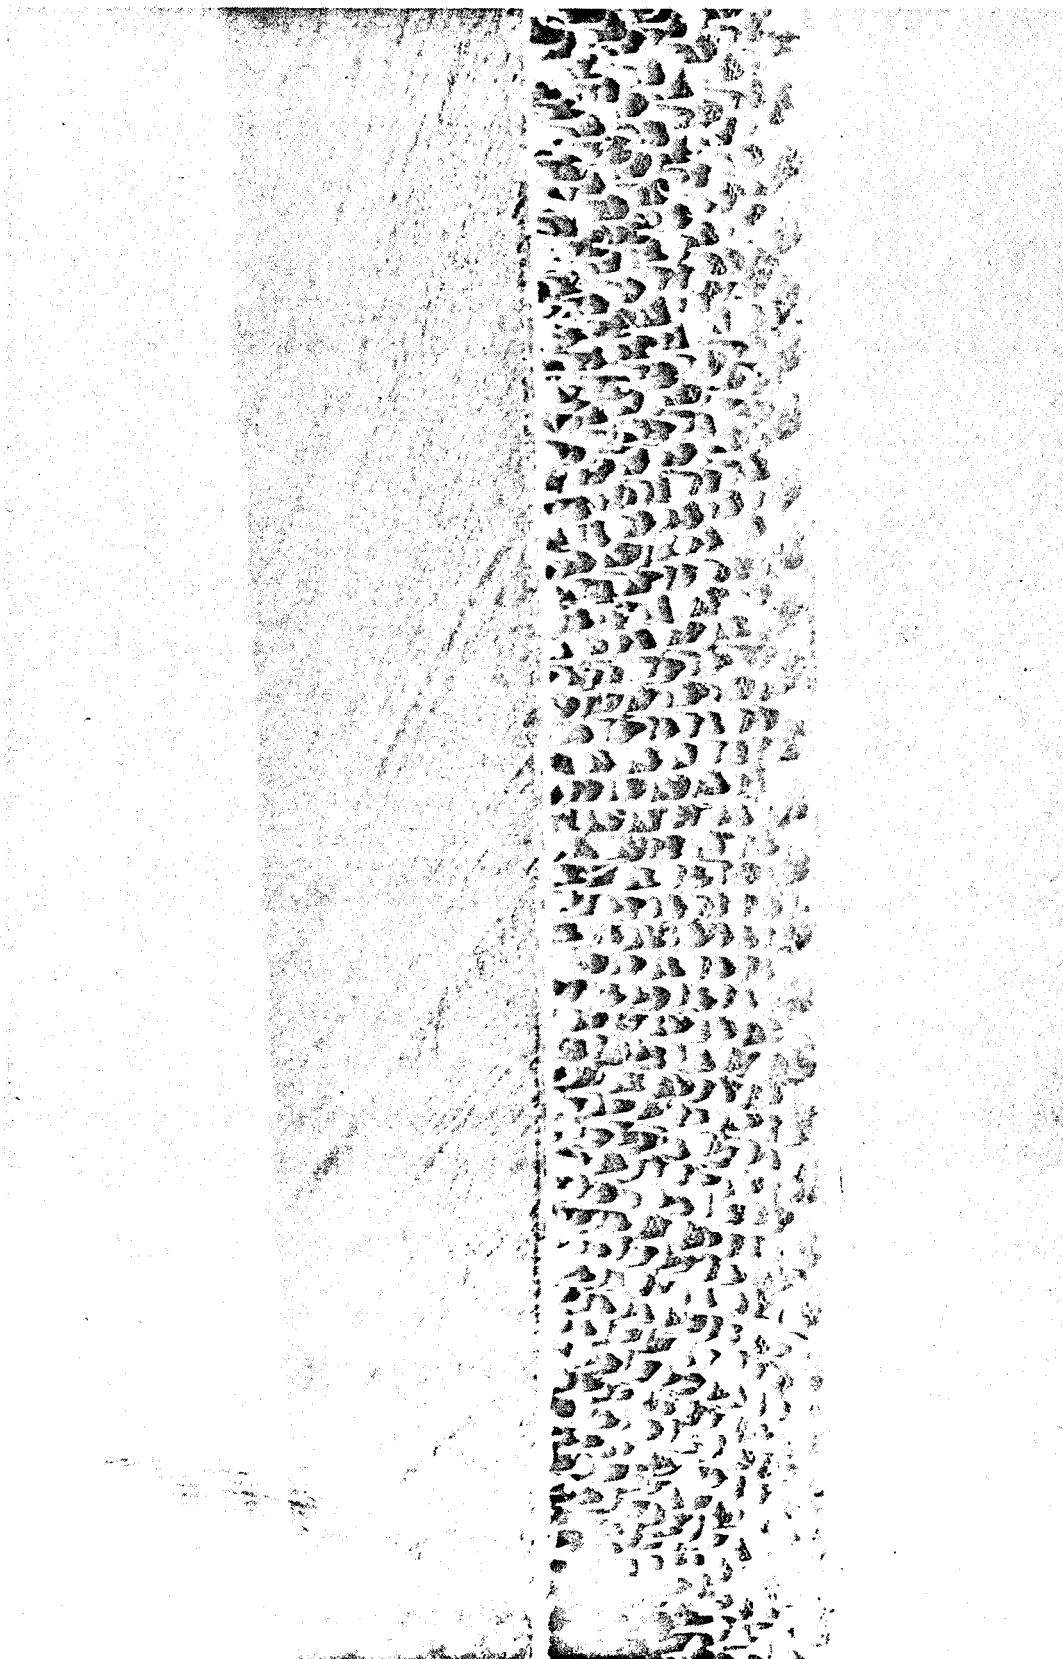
CLOSEUP OF SKIN-TO-CORE ADHESIVE FILLETING
